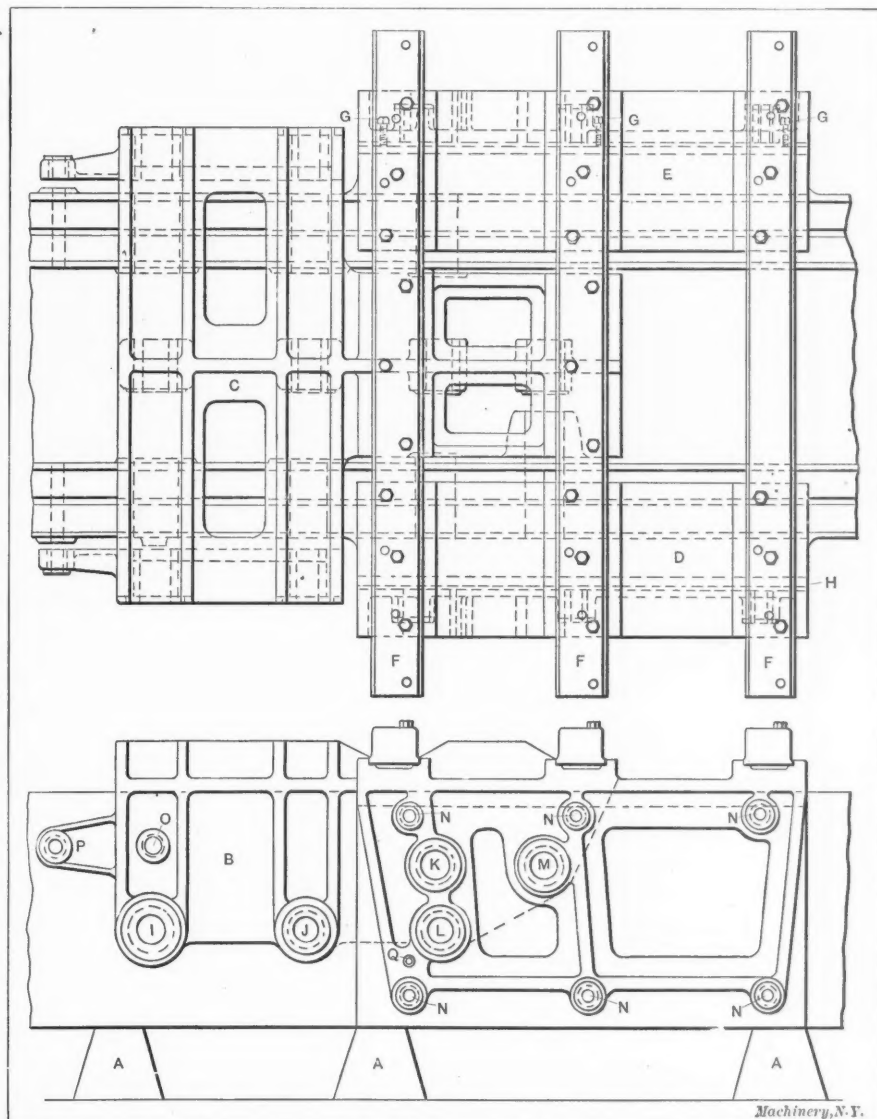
Combination Boring and Drilling Jig in Position on the Bed
